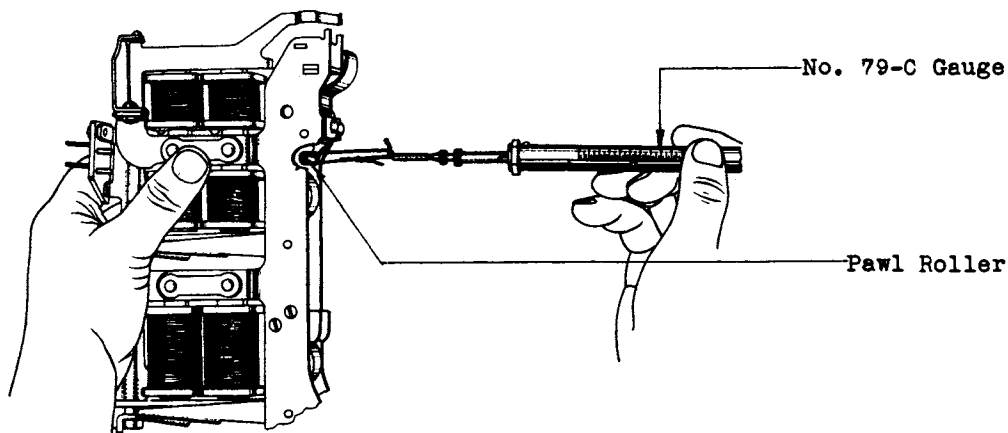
Method of Measuring Tension of Pawl Roller Against Pawl Operating Arm
